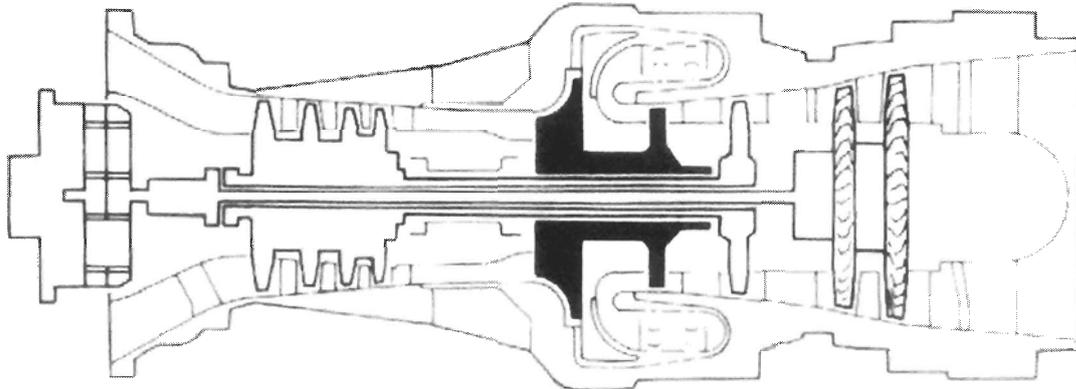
Twin Spool Turbo Shaft engine with free power turbine
